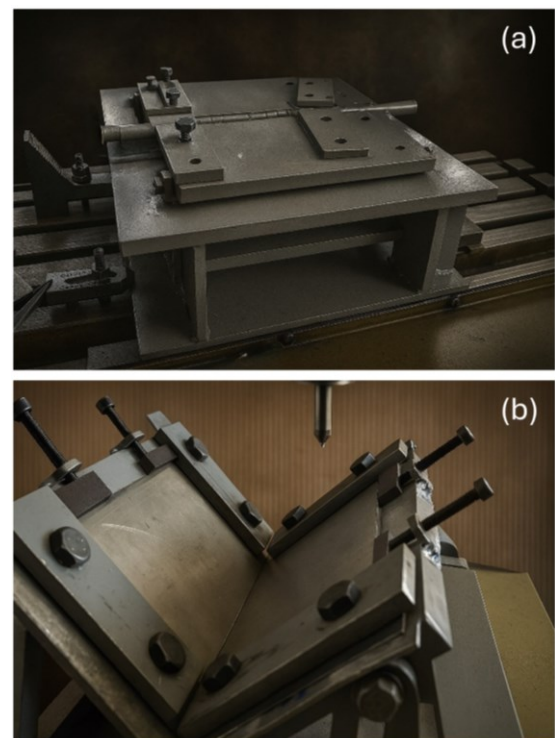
Experimental photographs of the adjustable fixture: (a) machine-mounted setup and (b) workpiece configuration for angle control.
